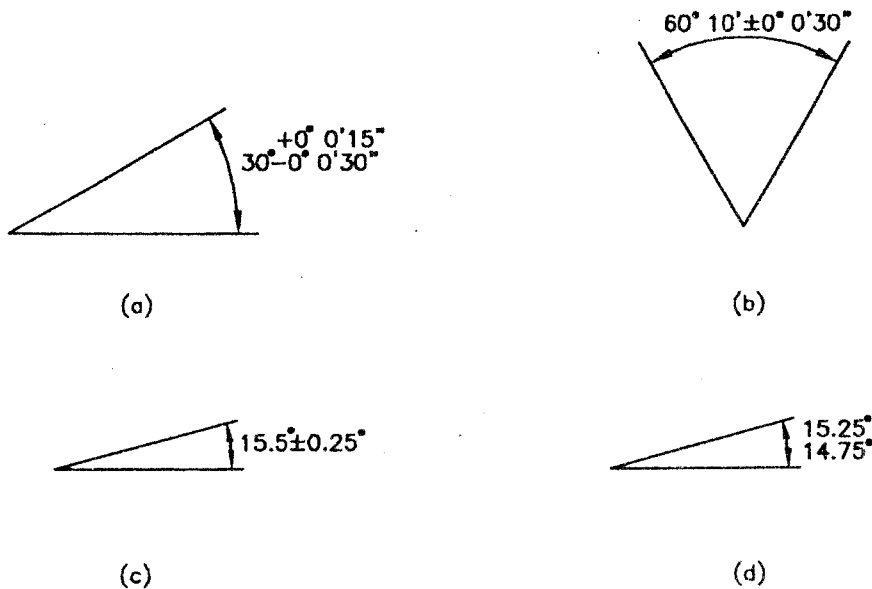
Indication of Tolerances for angular dimension
